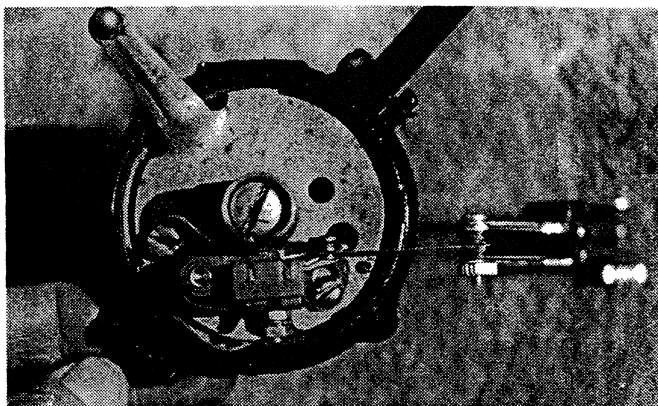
Distributor all assembled. This shows a feelers gauge inserted to get the correct point gap. Screwdriver is used against roll pin and notch in point assembly to move points.
